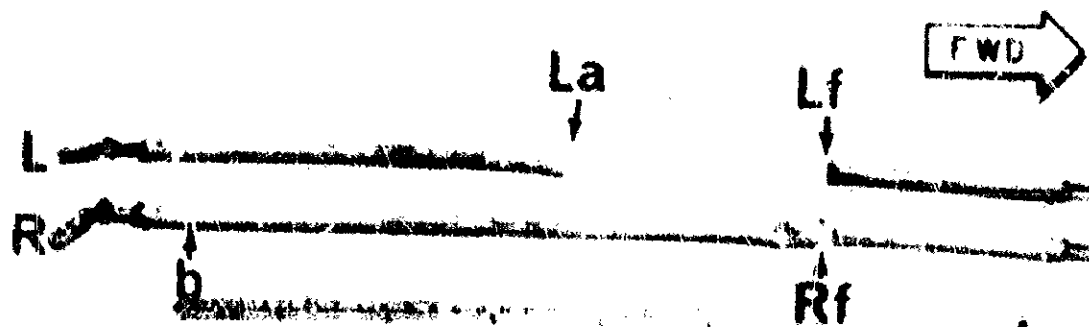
A.—Left and right elevator control rods showing symmetrical fractures 11 inches aft of aft bellcranks. Note missing sections of left elevator control rod.
